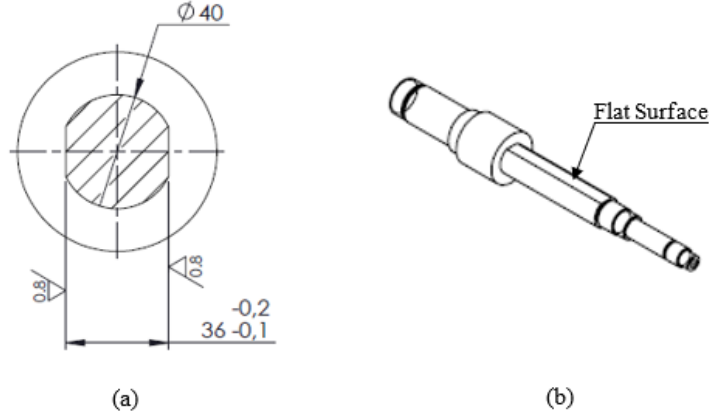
Cross section of the HSPM generator rotor shaft with flat surfaces
